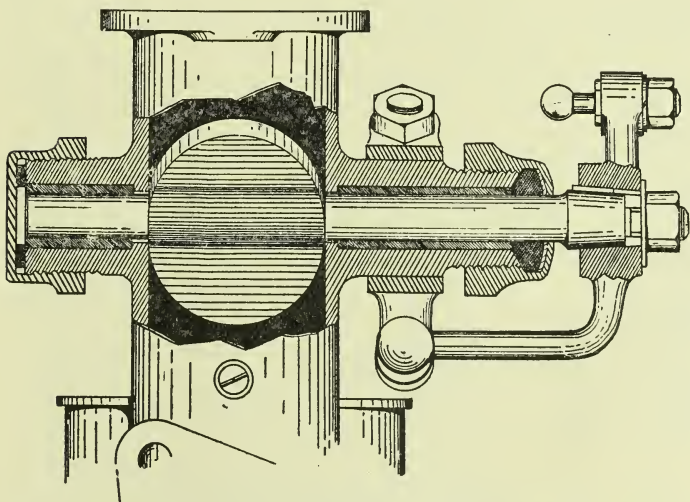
SECTIONAL VIEW THROUGH THE CARBURETER THROTTLE OF THE TYPES-J AND L ENGINE
